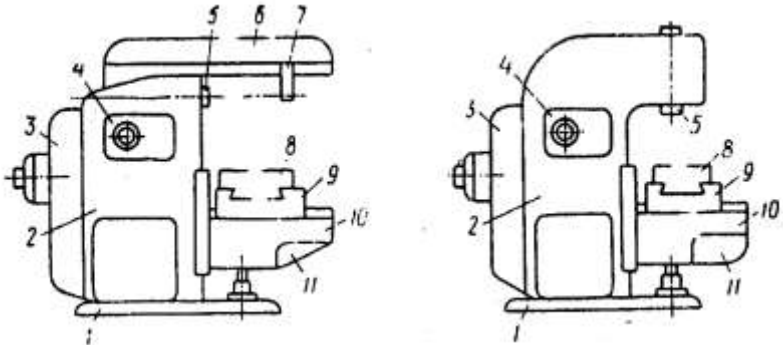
Horizontal (a) and vertical (b) knee and column milling machines
